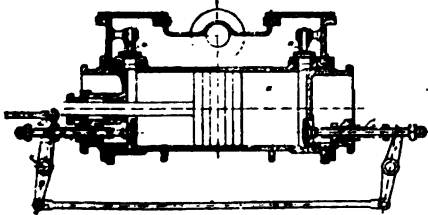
A RECENT TYPE OF WATER COMPRESSOR.
